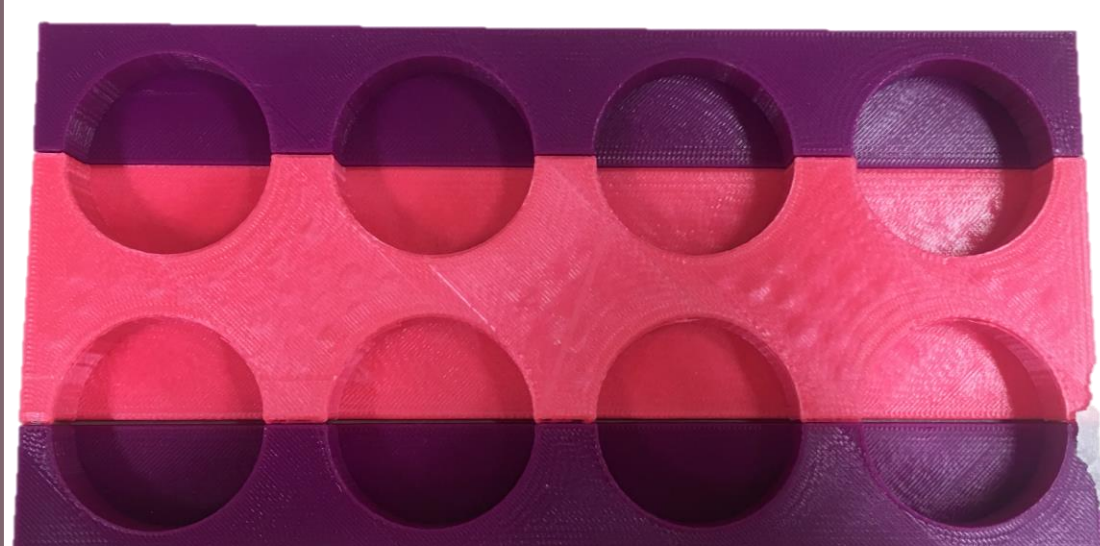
The 3D printed mold, which was put together using an adhesive. Polyethylene film lined the inside of the mold to prevent sticking of the dental stone.
